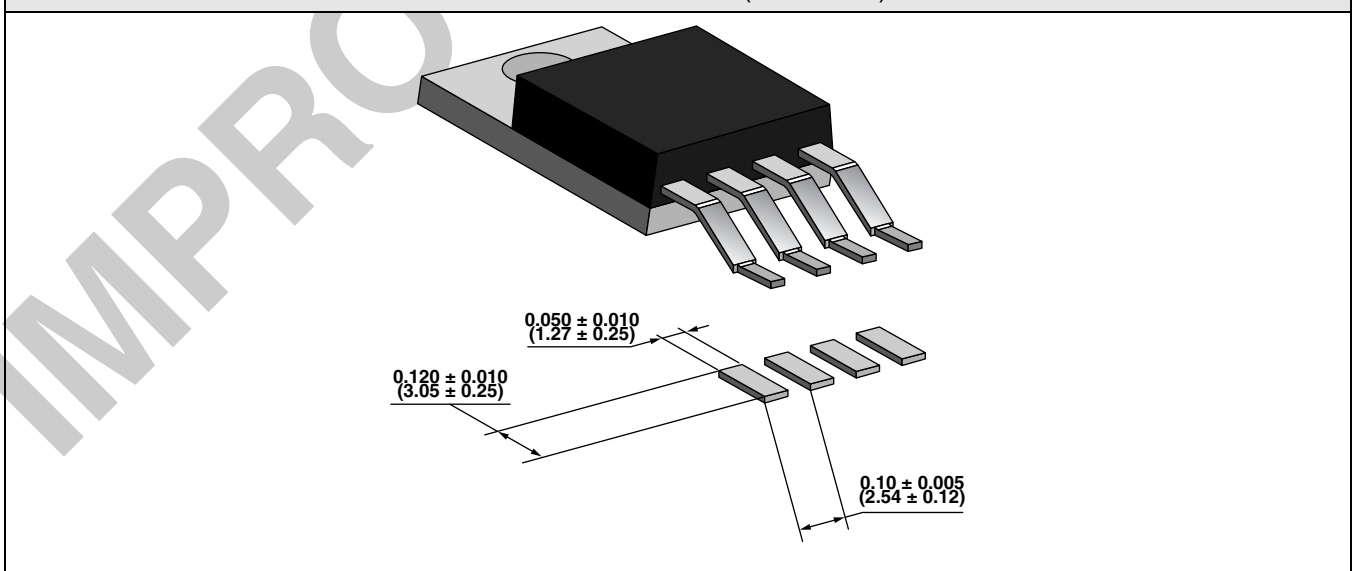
LAND PATTERN DIMENSIONS in inches (millimeters)
